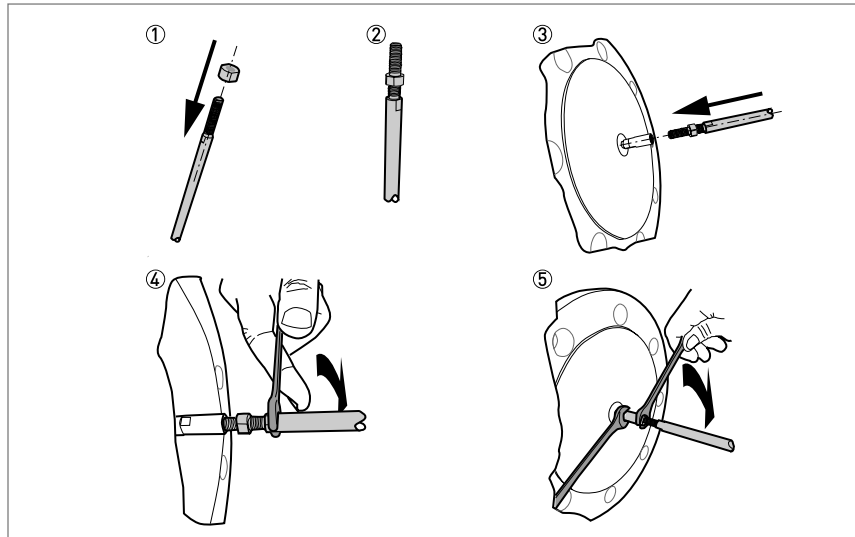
Attachment of Locking and Union Nuts to Single Rod
